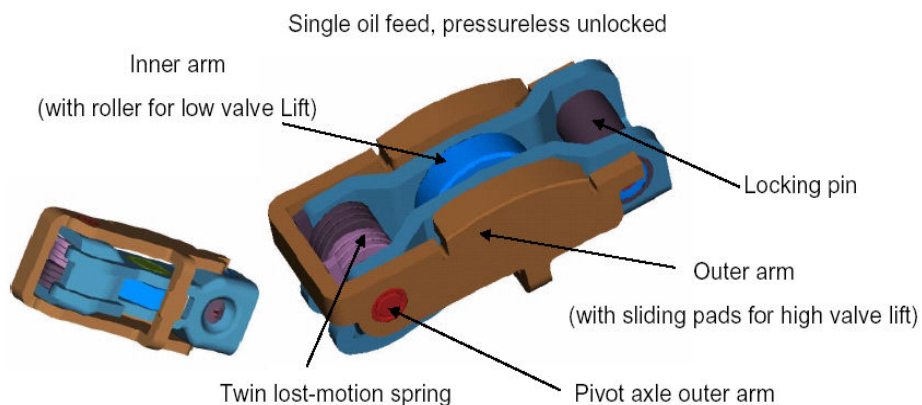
Symmetrical Roller Finger Follower (SRFF)
